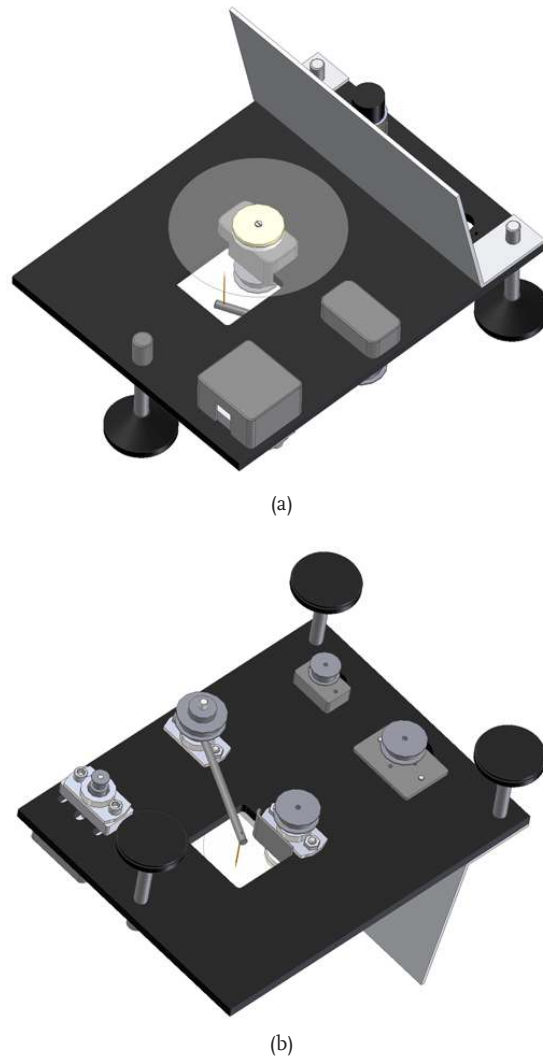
Design sketches of the spiral spinner. (a) isometric view. (b) bottom view.
